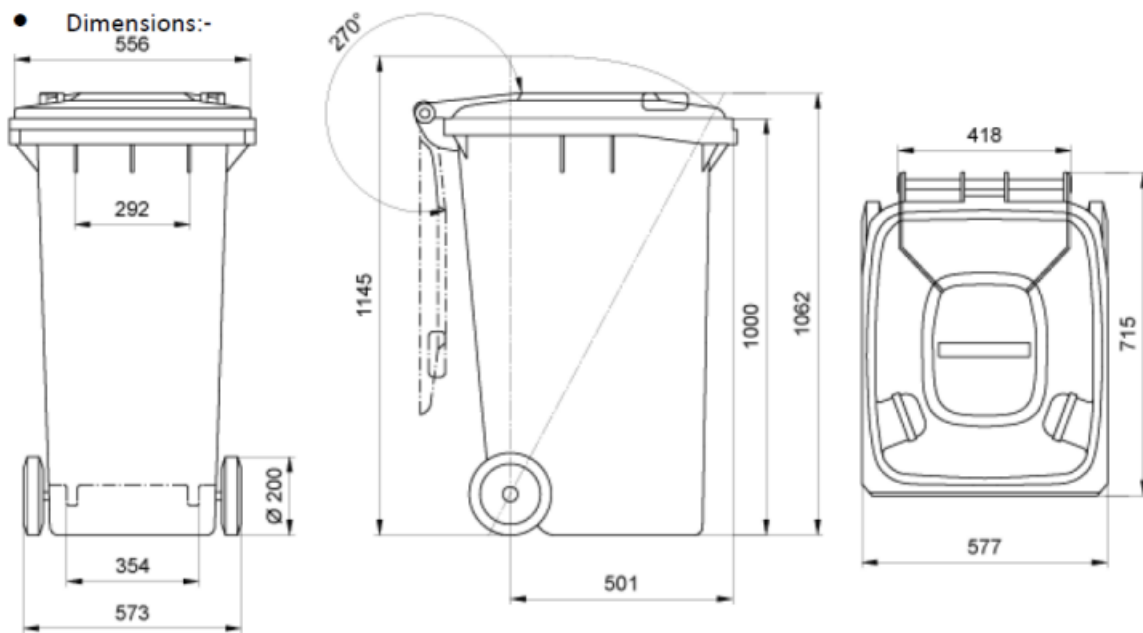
Dimension of a 240 ltr. Wheelie bins
